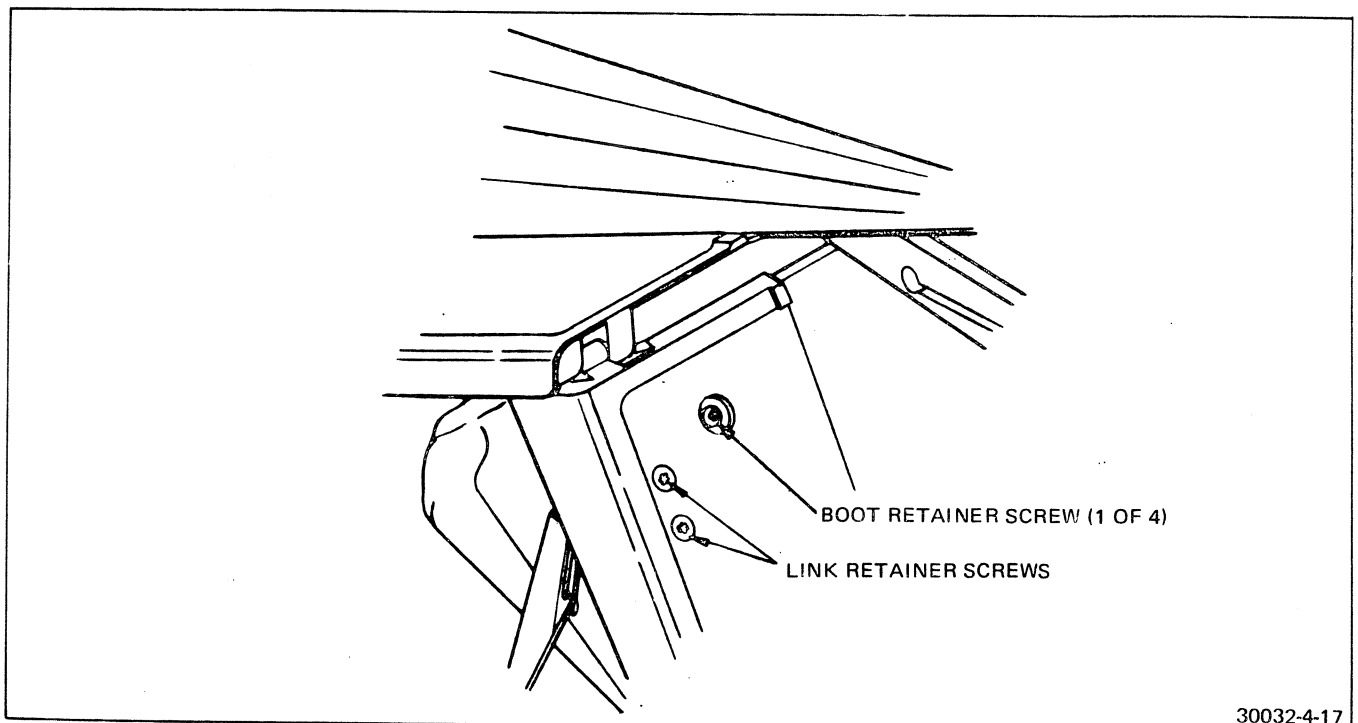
LOCATION OF BOOT AND LINK RETAINER SCREW
